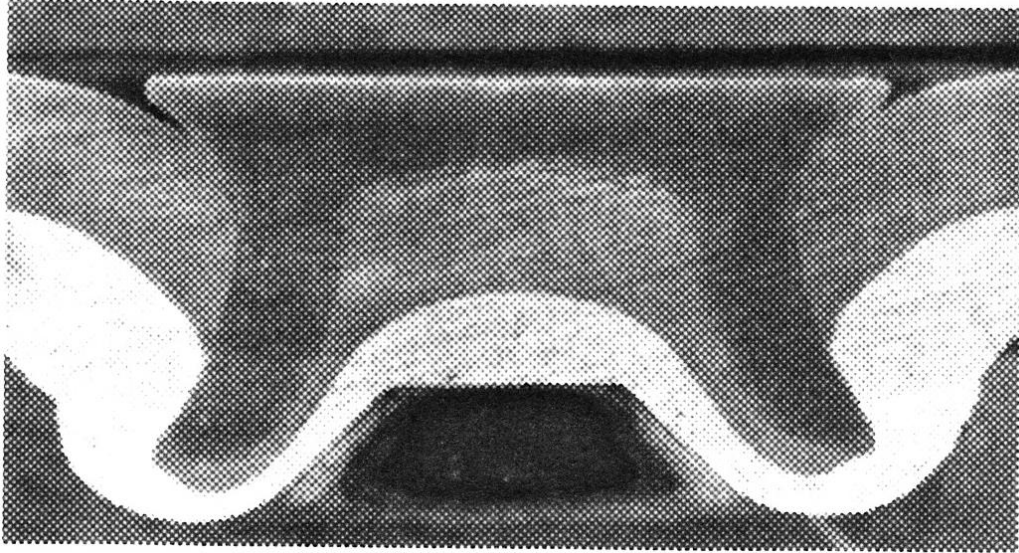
Cross section for experimental SPR forming of 1.4mm SPFC440 (upper sheet) and 1.5mm Aluminum (lower sheet)
